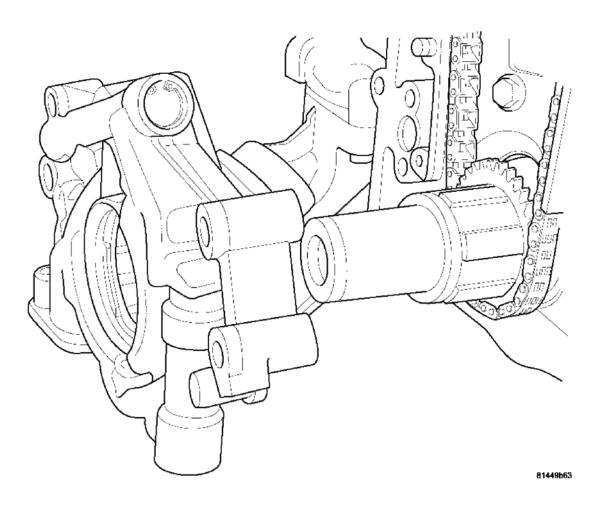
Removing/Installing Oil Pump Courtesy of CHRYSLER LLC
